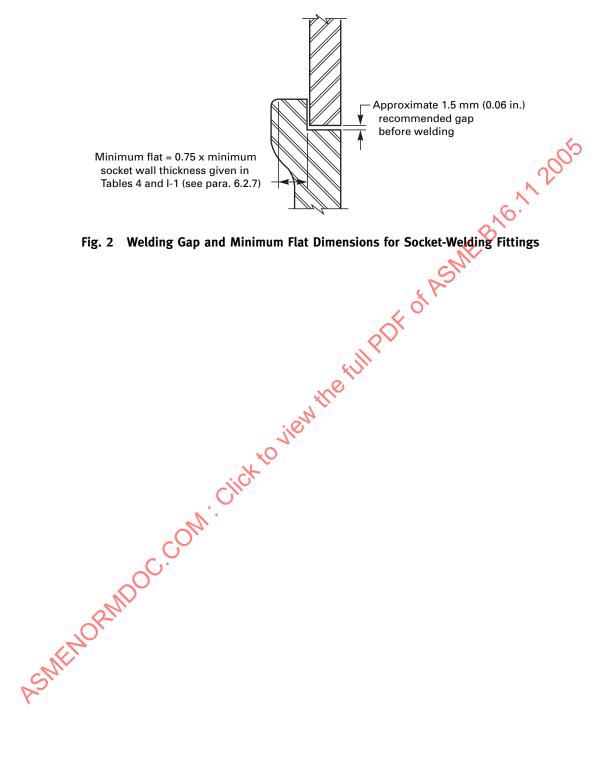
Welding Gap and Minimum Flat Dimensions for Socket-Welding Fittings
